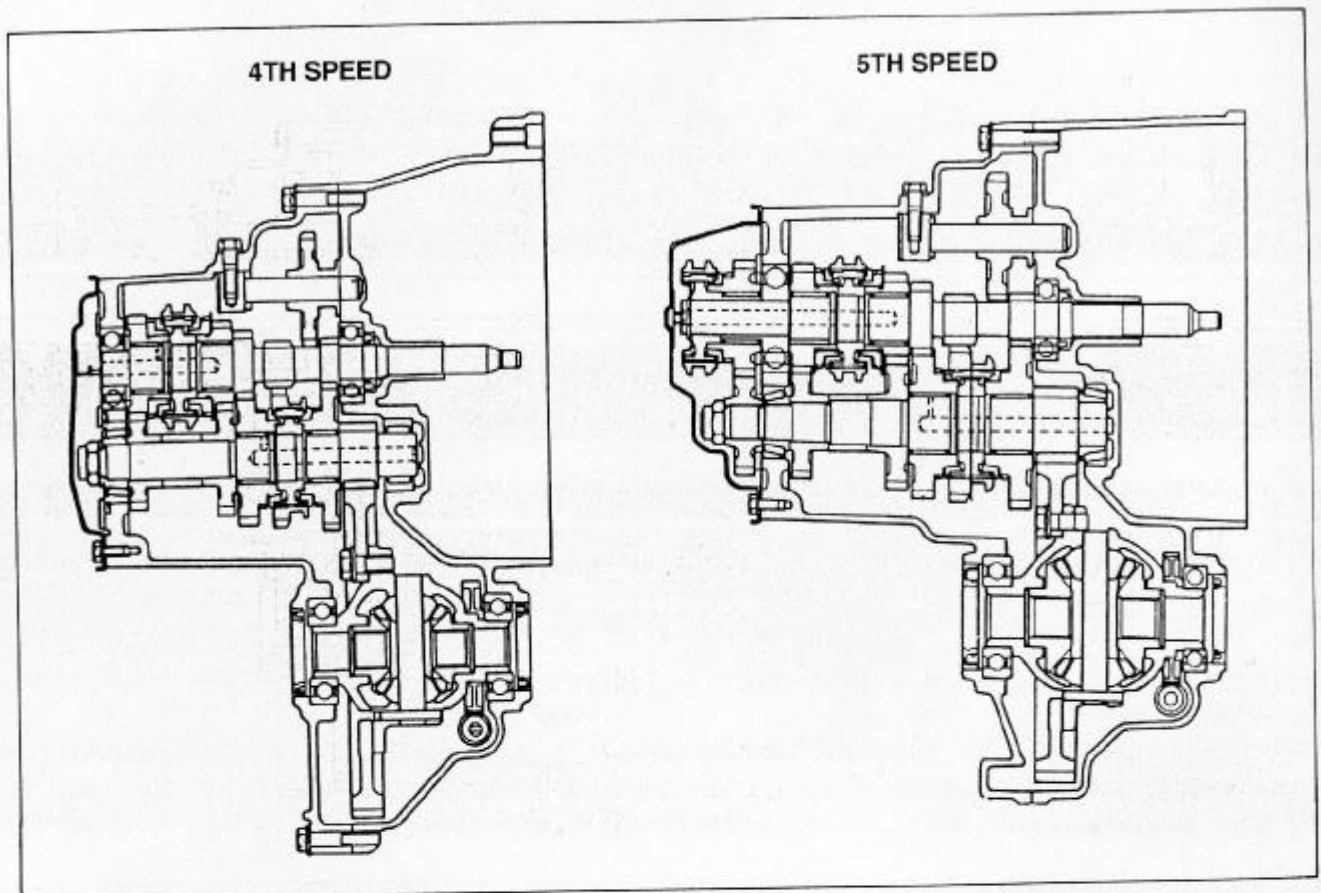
A — 4 SECTIONAL VIEW OF 4TH-SPEED AND 5TH-SPEED TRANSMISSIONS
